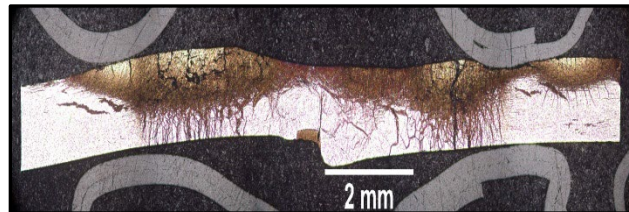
Cross section through the weld and HAZ showing the cracking and hydrides
